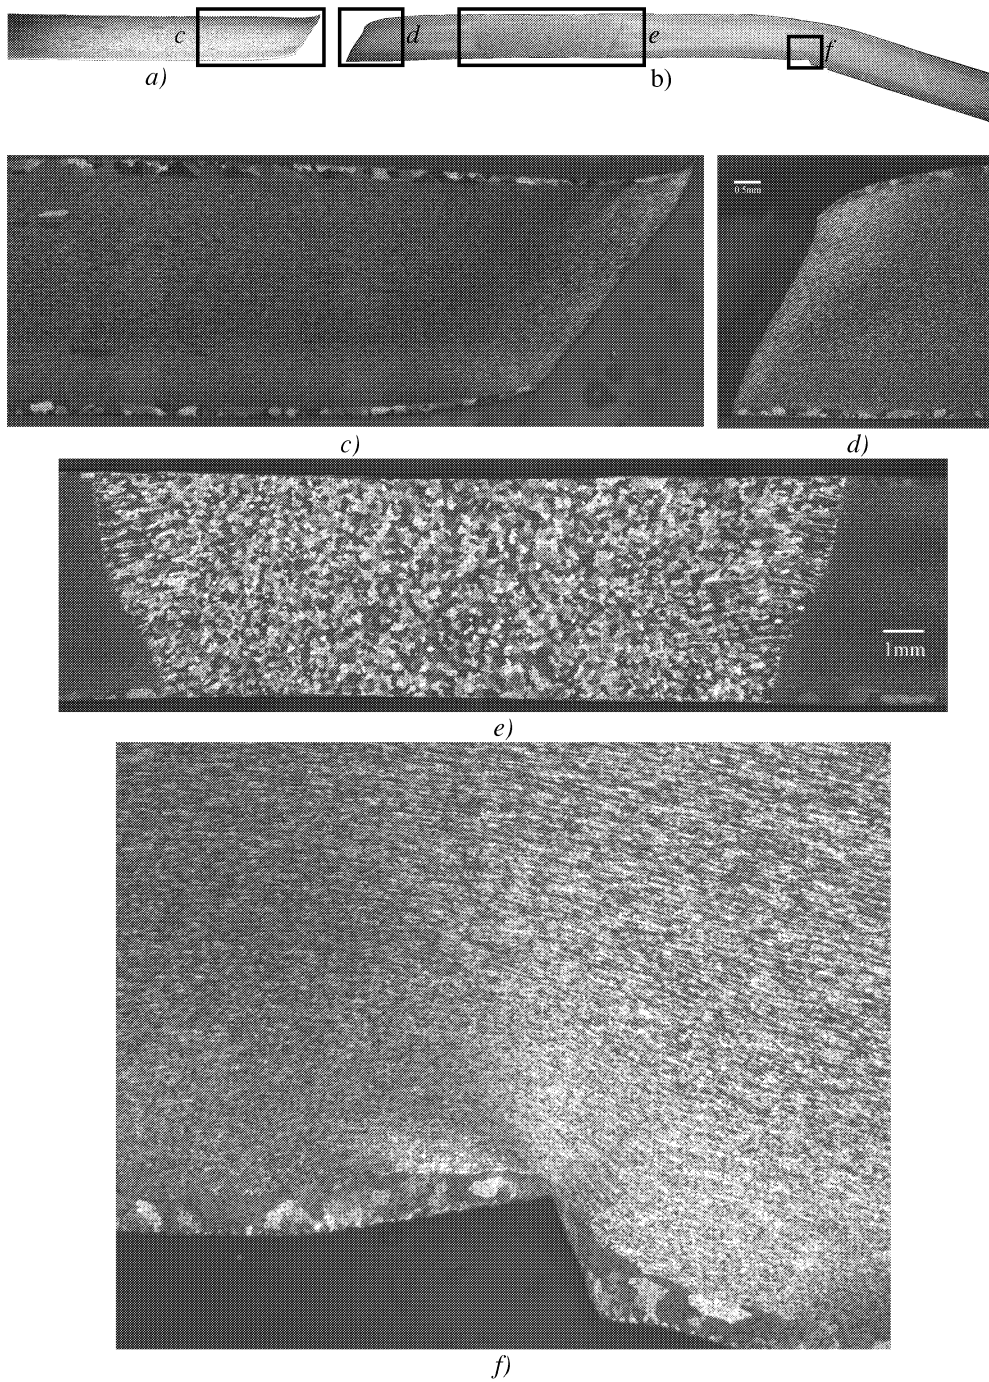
Section across the weld in test specimen A1-3: a) and b) Section S1-S1 in Figure 89, c) and d) magnification of the shear fracture, d) the weld, and f) the shear localisation at the circumference of the projectile.
